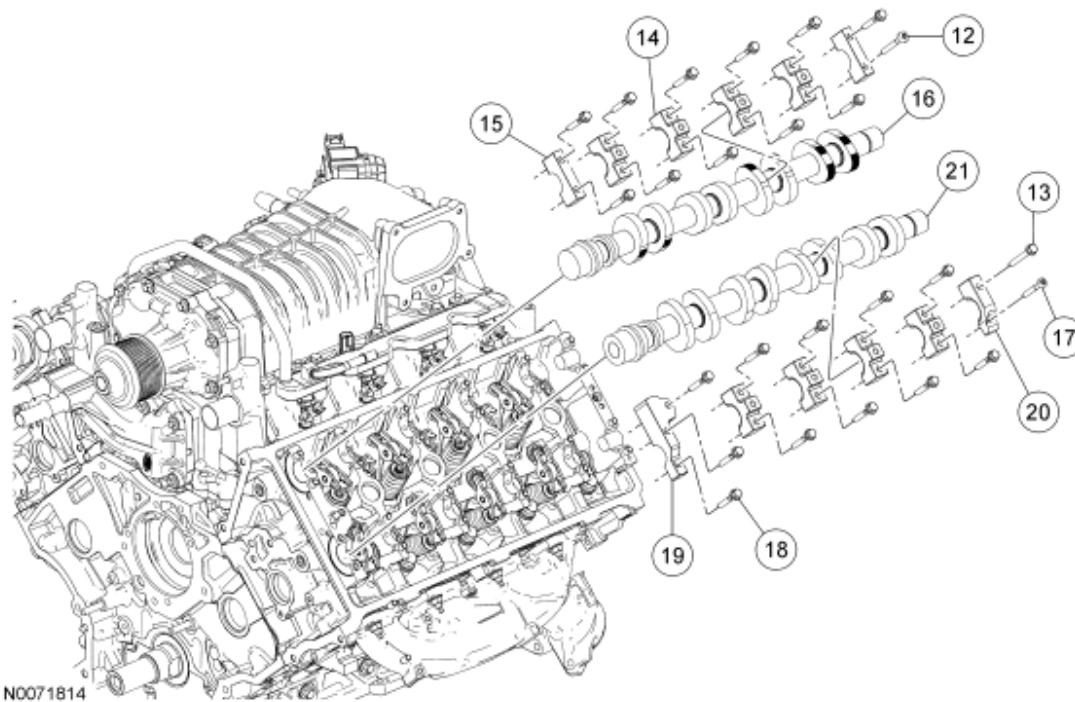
Exploded View Of LH Camshaft (2 Of 2)
